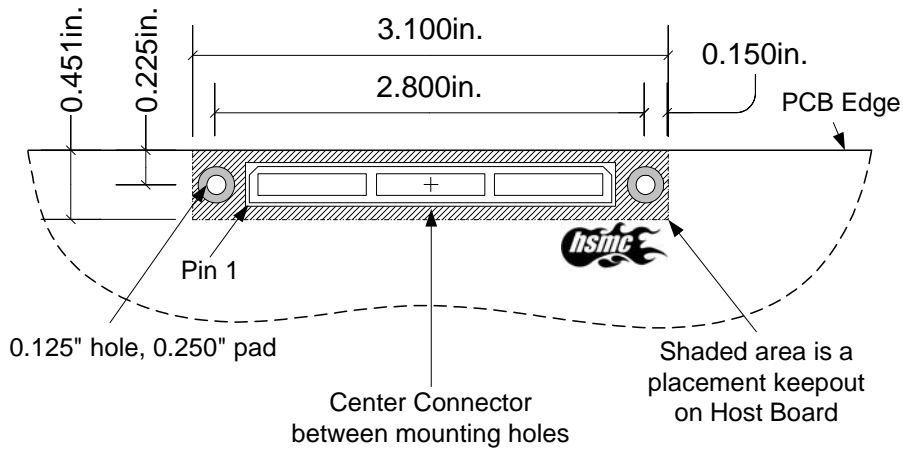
shows the dimensions of the keepout area and mounting holes.
